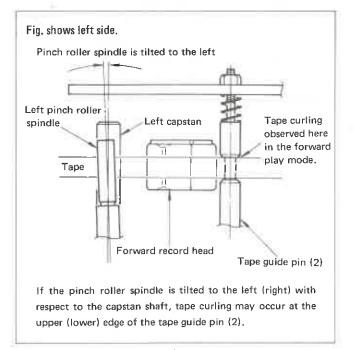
Example of improperly aligned pinch roller and capstan
